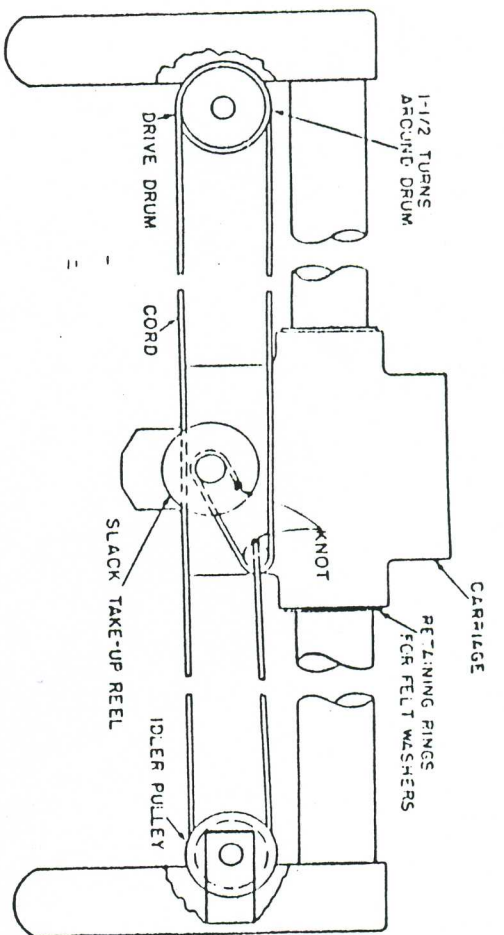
Backview of drive mechanism showing arrangement of nylon cord.
